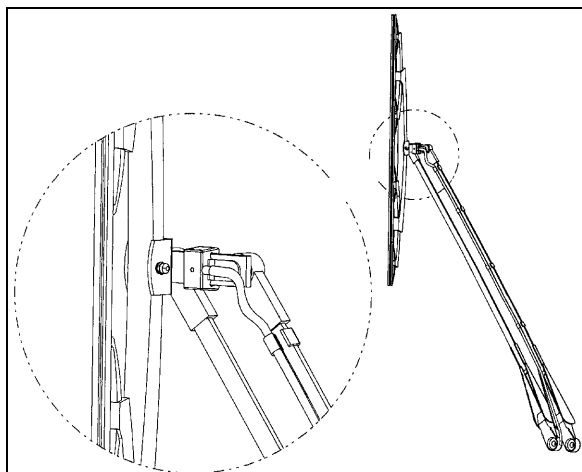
WINDSHIELD WIPER (MOTOR SIDE) 23328
